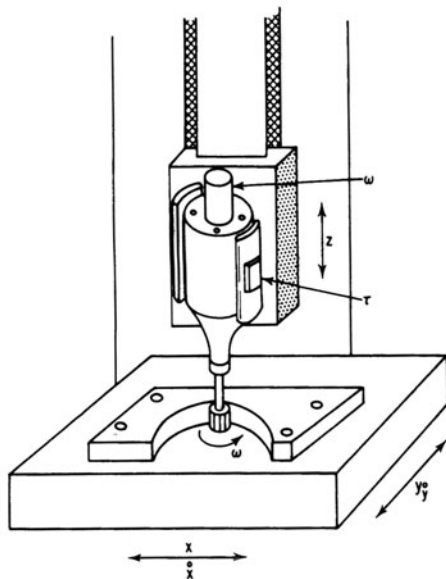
Variables involved in adaptive control system for a 2-axis milling machine.
